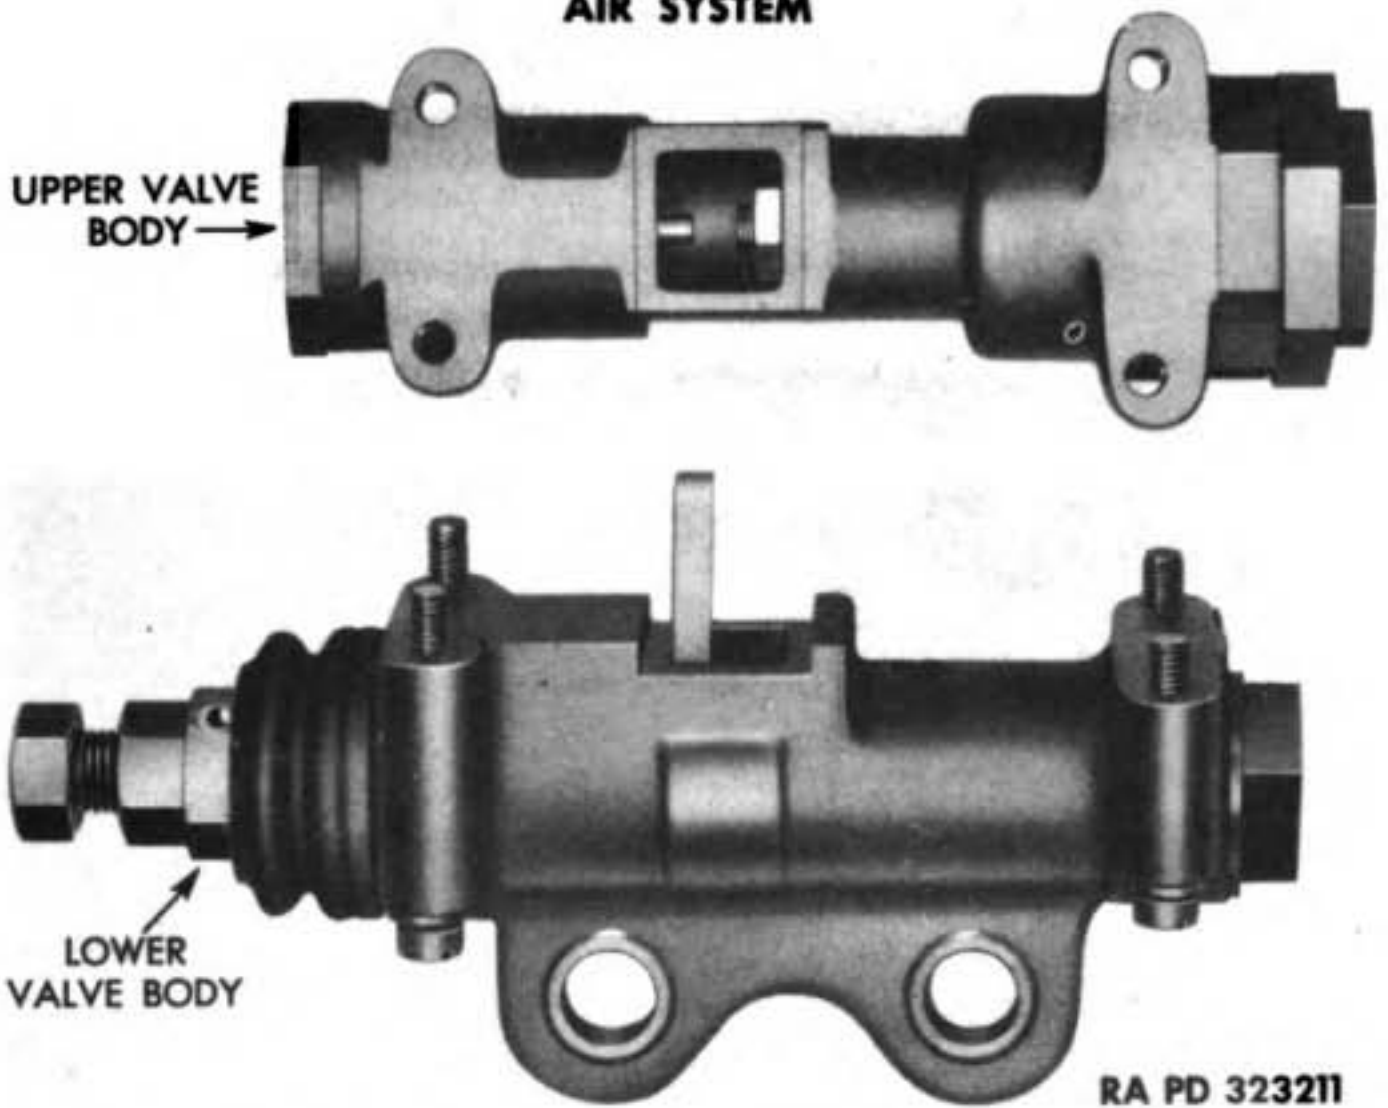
Upper Valve Body Separated from Lower Valve Body
